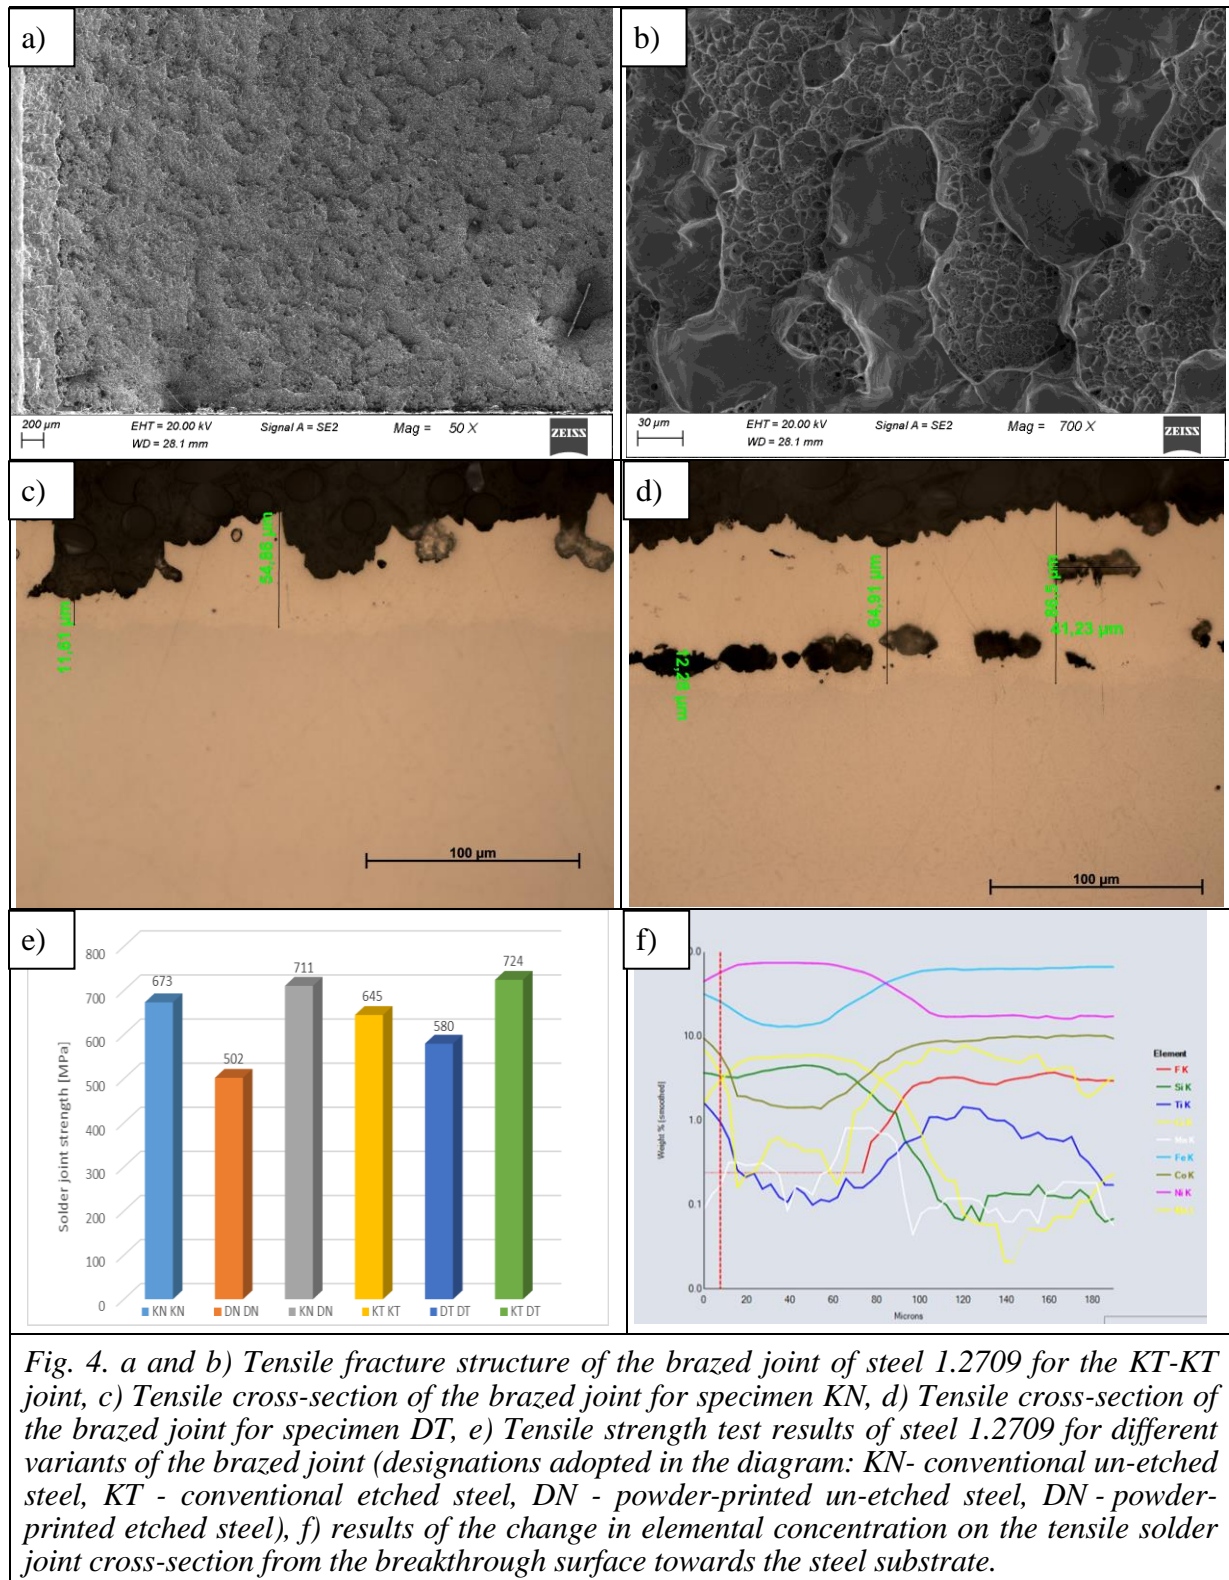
a and b) Tensile fracture structure of the brazed joint of steel 1.2709 for the KT-KT joint, c) Tensile cross-section of the brazed joint for specimen KN, d) Tensile cross-section of the brazed joint for specimen DT, e) Tensile strength test results of steel 1.2709 for different variants of the brazed joint (designations adopted in the diagram: KN- conventional un-etched steel, KT - conventional etched steel, DN - powder-printed un-etched steel, DN - powder-printed etched steel), f) results of the change in elemental concentration on the tensile solder joint cross-section from the breakthrough surface towards the steel substrate.
